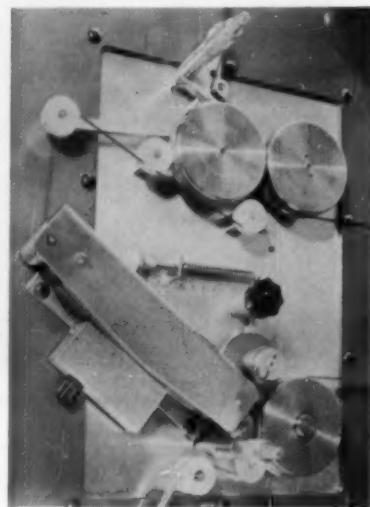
Laminating mechanism. Shown are: (top) rotary slitting knives; (left) heater and thermostat; (lower center) tape guide and pressure roller.
